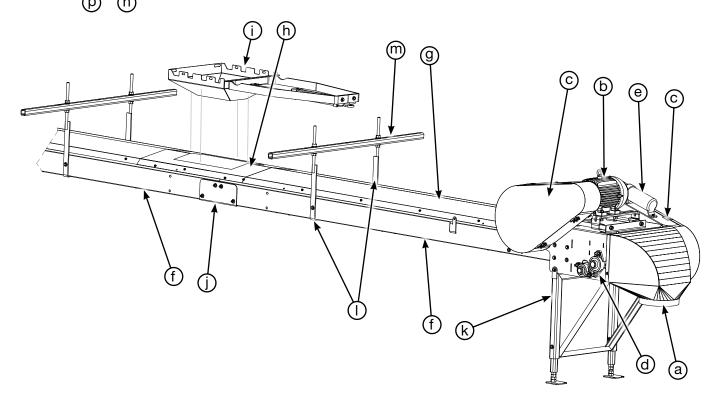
Drawings of an 18" underbin conveyor with end drive
